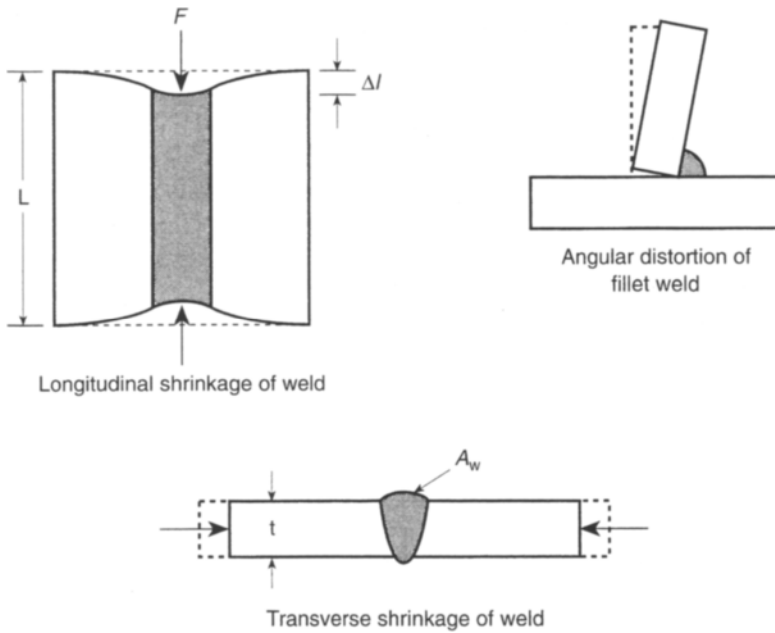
Distortion common to butt and fillet welds. Butt welding results in longitudinal shrinkage, Δl , and angular distortion, δ .
